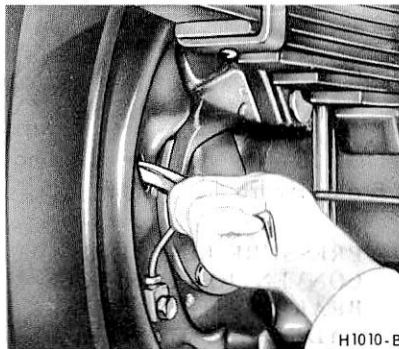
Two-Cylinder Brake (Rear) Shoe Adjustment
